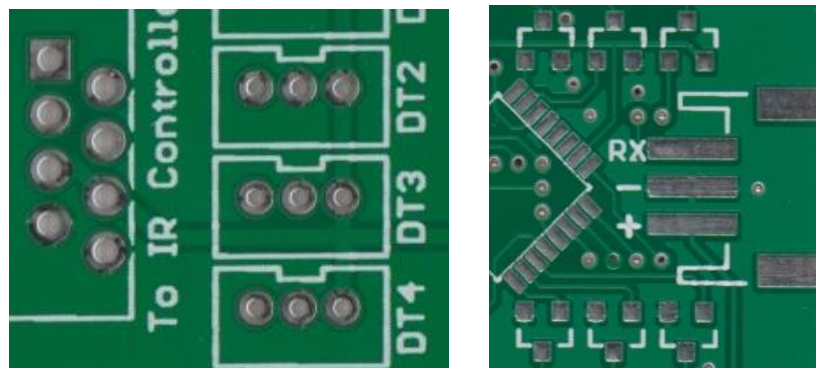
PTH (plated through-hole) pads on the left, SMD (surface mount device) pads on the right
